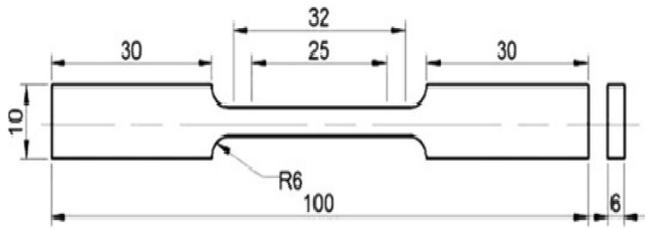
Dimension of the Tensile Specimen (ASTM E8M-04).
